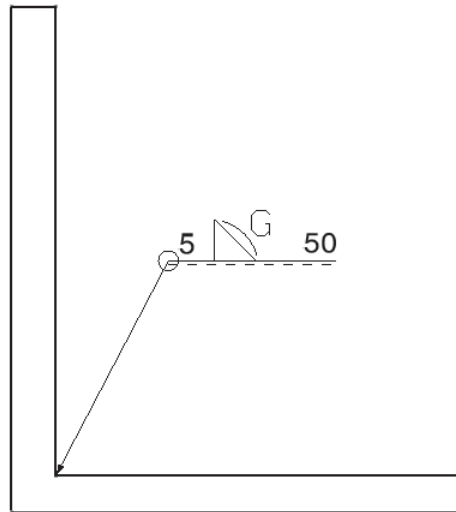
The drawing view, after adding the welding symbol
